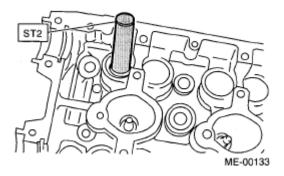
Identifying Valve Oil Seal Guide ST2 498857100 Courtesy of SUBARU OF AMERICA, INC.
